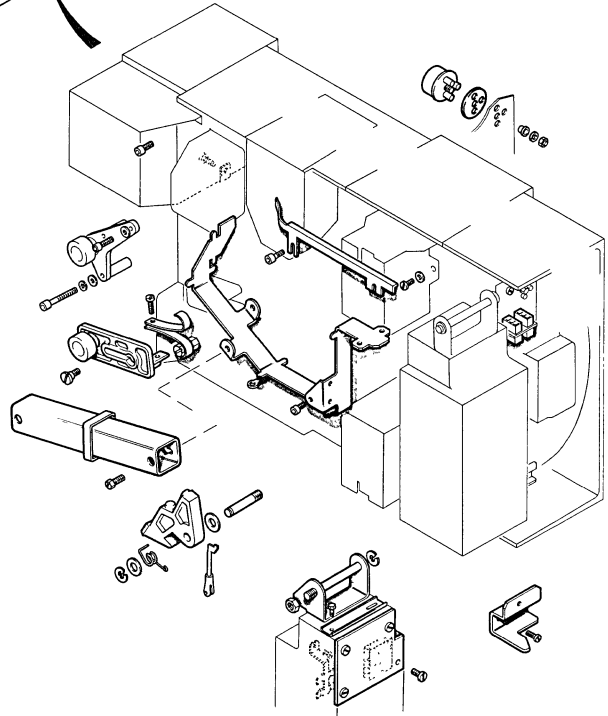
5444 DISK FILE, FINAL ASSEMBLY (PART 3 OF 4)
